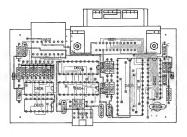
, IEC-625/IEEE-488 Interface pcb, lay-out component side
